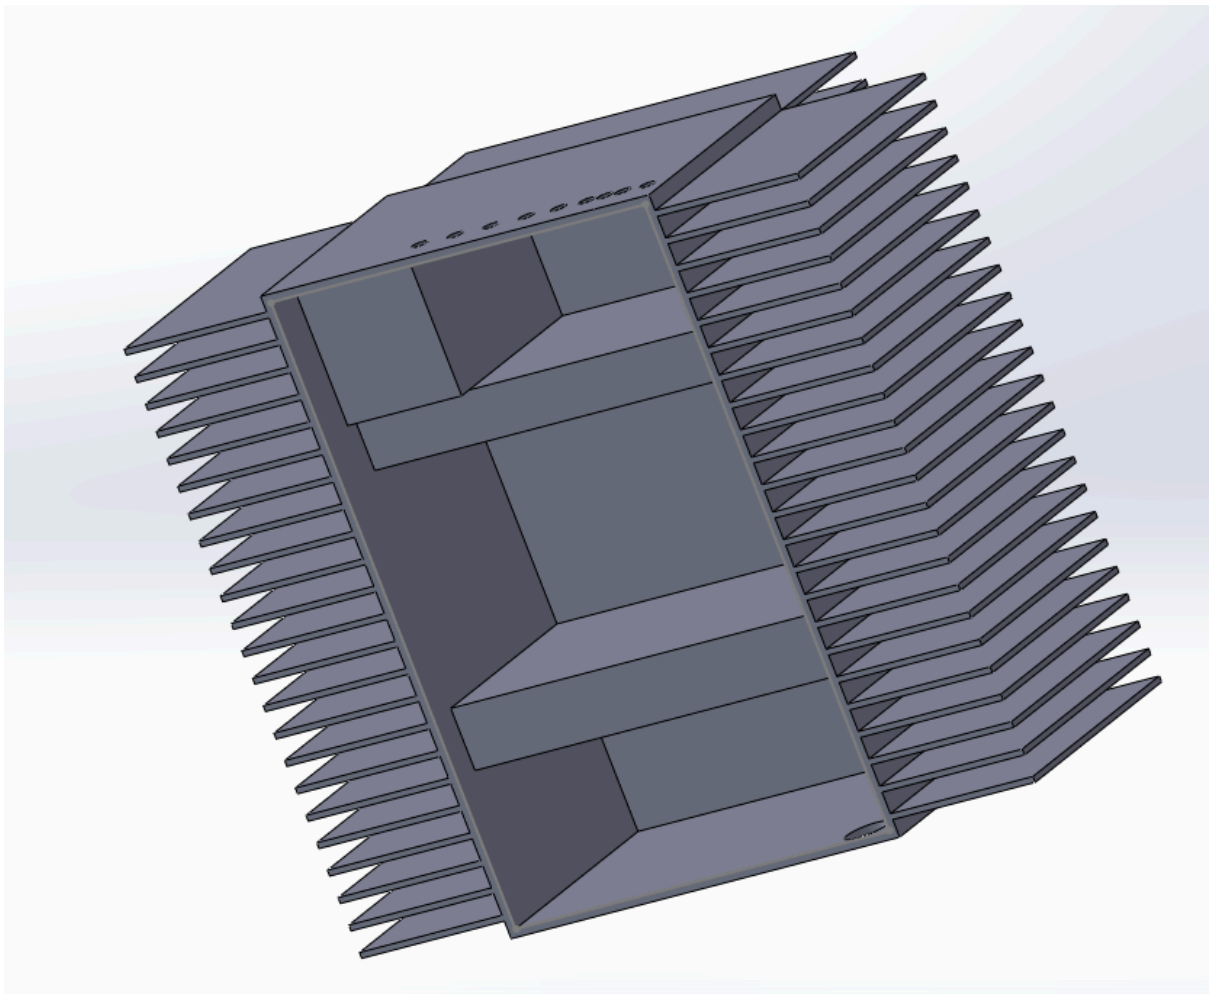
3D view of the bottom part of the casing and heat sink
